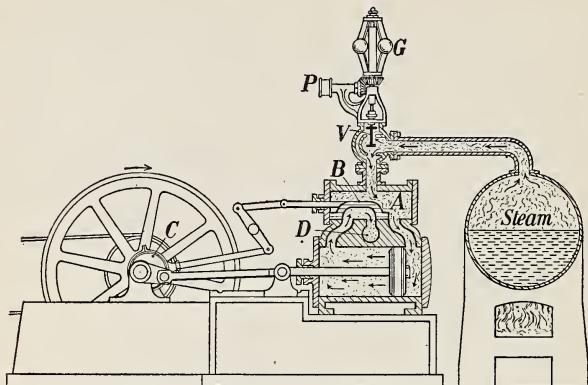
Essential working parts of a steam engine. (The governor *G* has been turned through a right angle to show the pulley *P* and the bevel gears).
